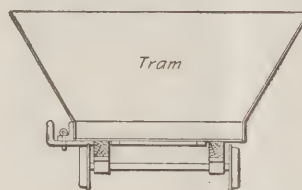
CROSS-SECTION, BUNKER CONVEYOR
